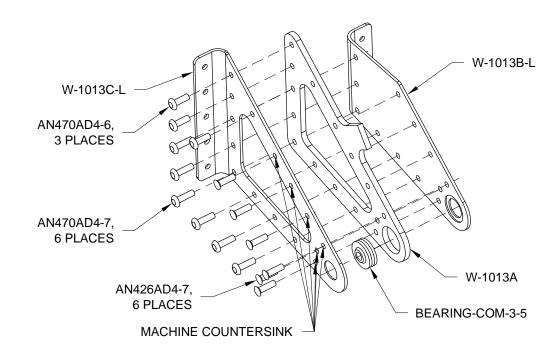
INBOARD AILERON BRACKET ASSEMBLY
